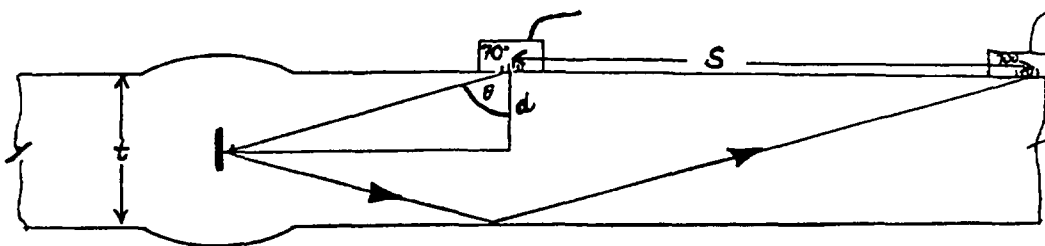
Tandem technique for double-vee welds scan.
